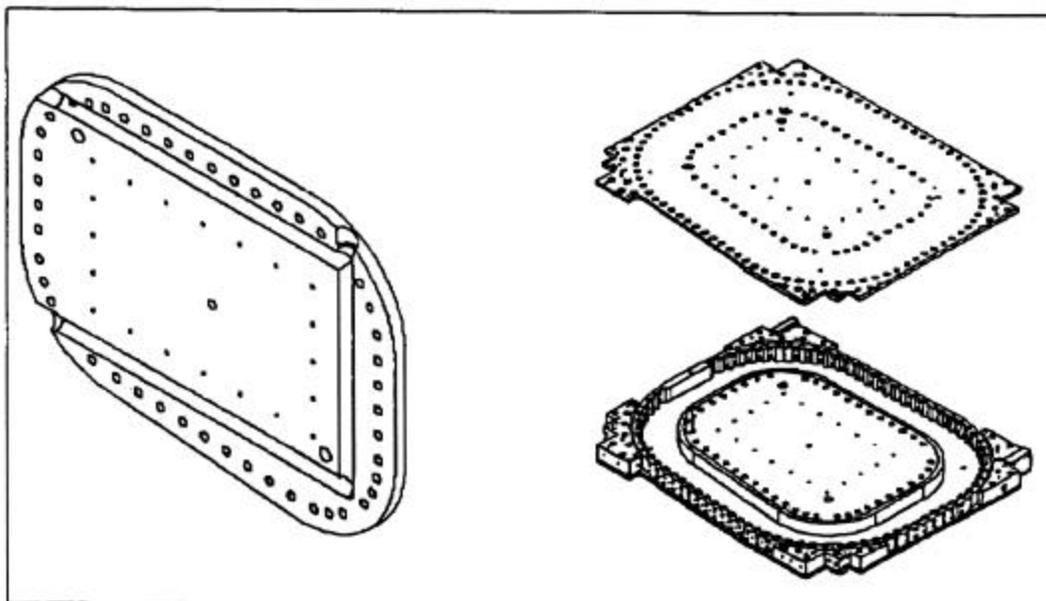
Coil Bobbin Showing gun-drilled cooling channels
